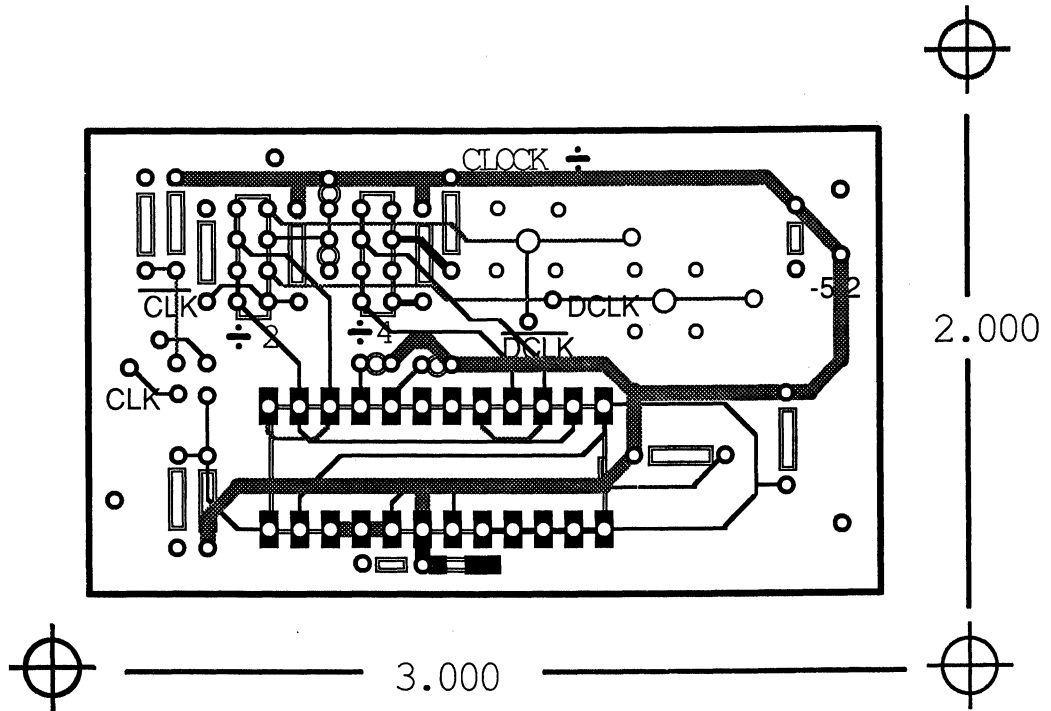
CLOCK DIVIDER BOARD LAYOUT AND COMPONENT POSITION
